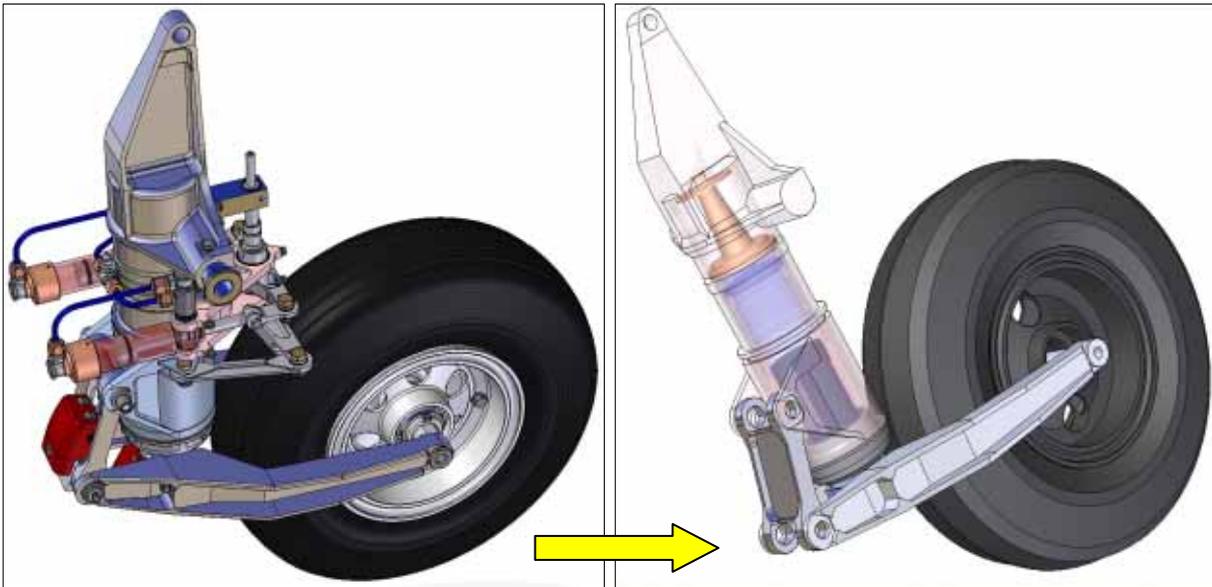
The accurate MCAD model assembly simplification by non-important subassemblies deletion and replacing of important ones with simplified - geometry single parts
